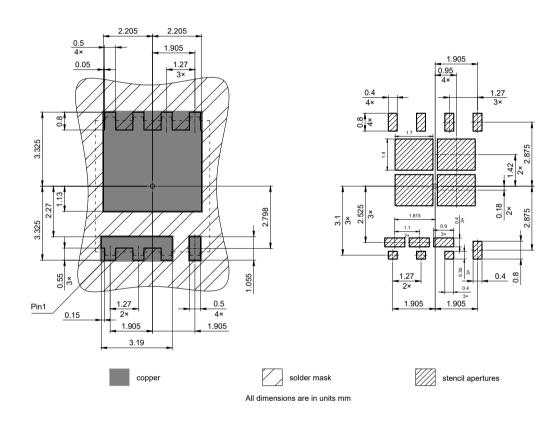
Footprint drawing PG-TDSON-8, dimensions in mm
